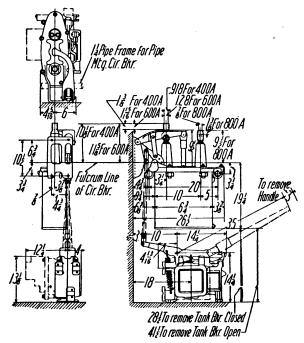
Type F-33 Single-Pole Electrically Operated Oil Circuit Breaker
